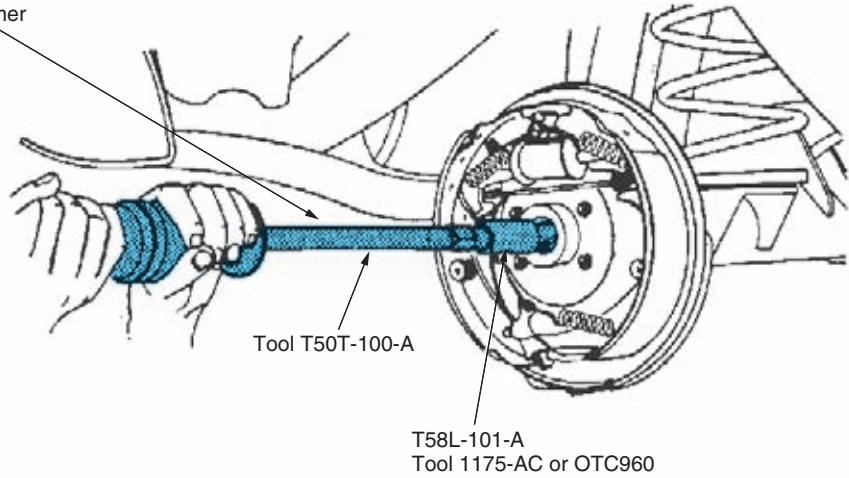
The bearing and seal are removed from the housing with a slide hammer and adapter. (Courtesy of Ford Motor Company)
